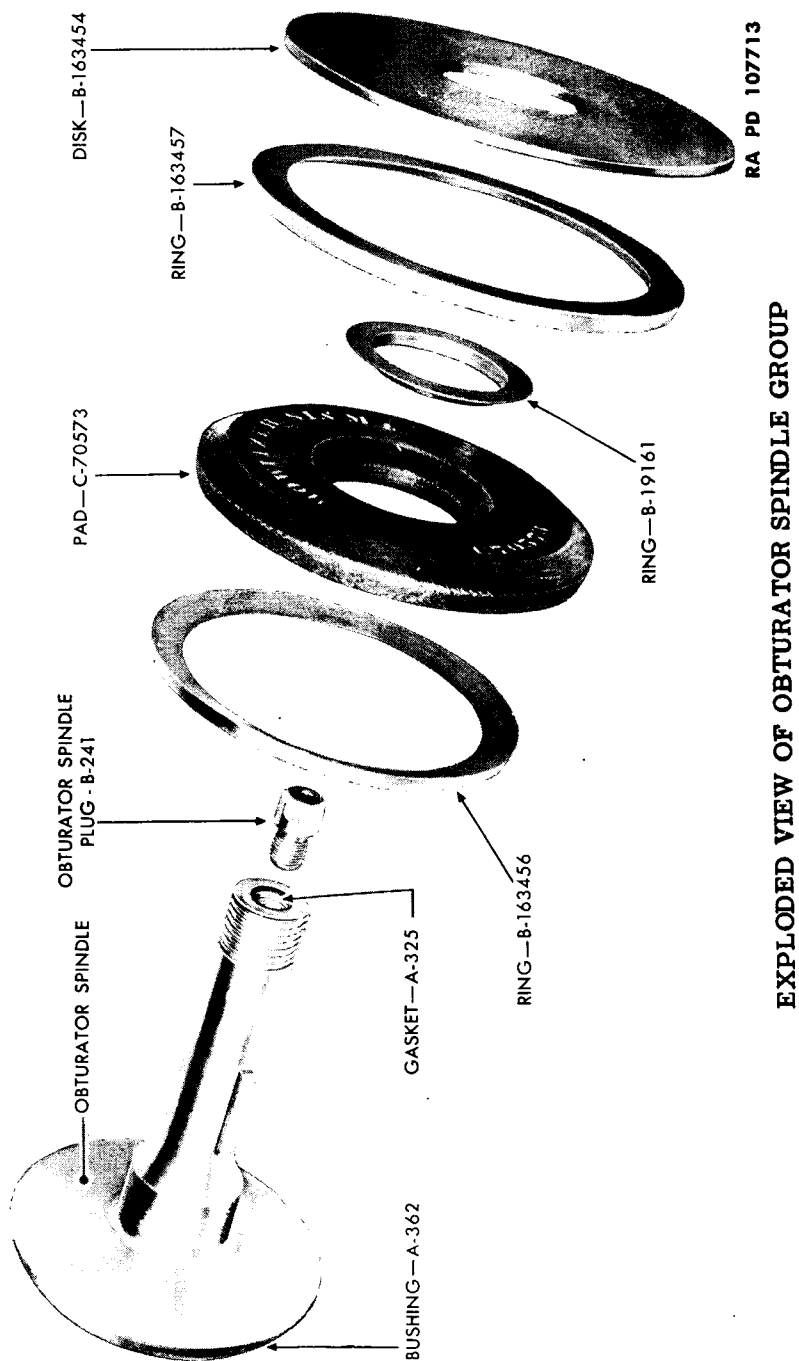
Obturator spindle group used with firing mechanism M1—exploded view.
